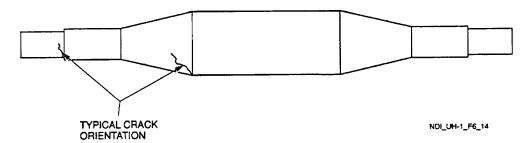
Hydraulic Servo Cylinder (Collective Control) Tube Assembly.
